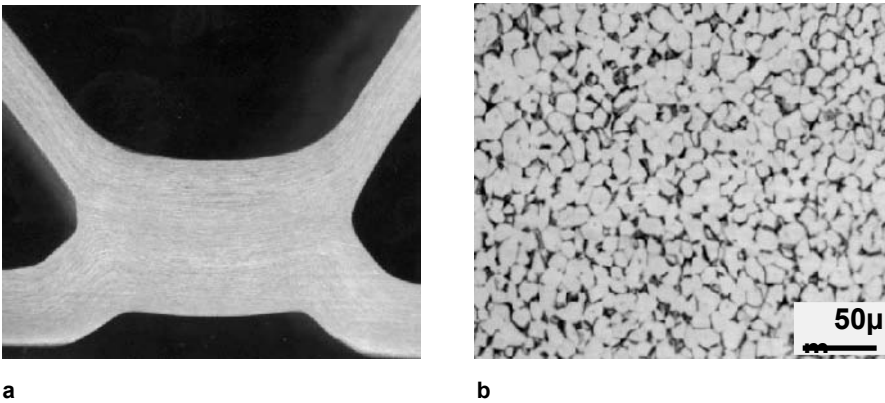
Diffusion bonded (DB) joint of two sheets in a SPF/DB component, LM: (a) Low magnification showing complete bonding (b) High magnification showing no evidence of the prior bond location (courtesy W. Beck, FormTech)
